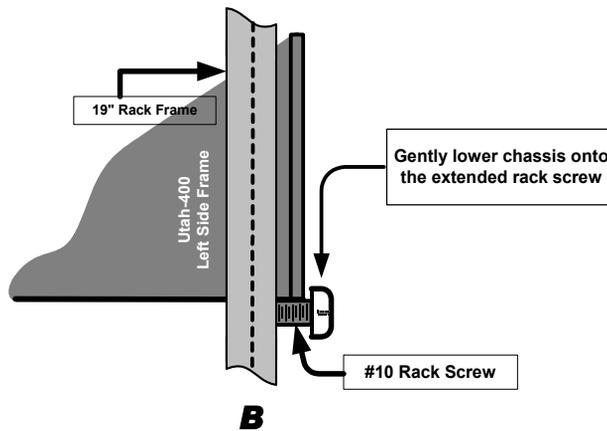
Lowering the Utah-400 Chassis on the Rack Screw
